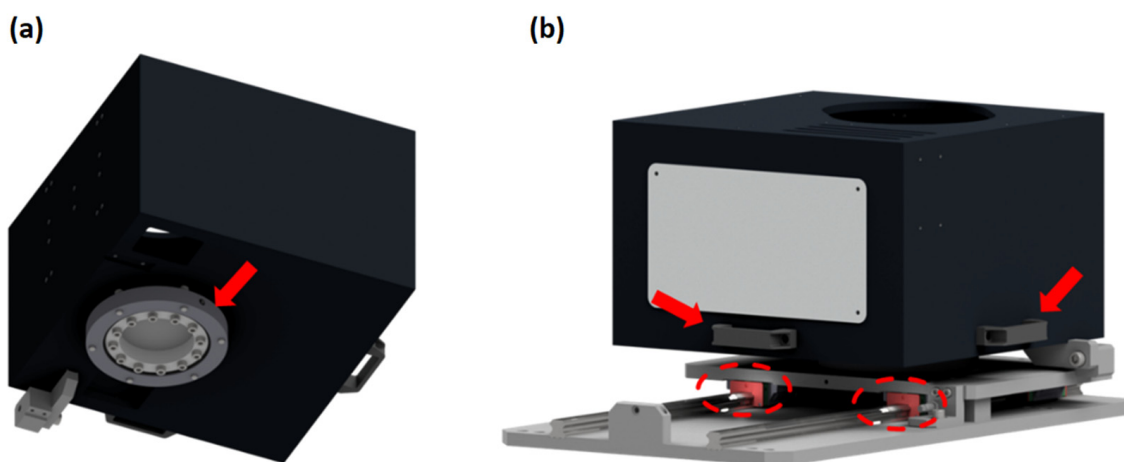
(a) Bearing and (b) linear guidelines systems installed in the Zamak injection machine.
